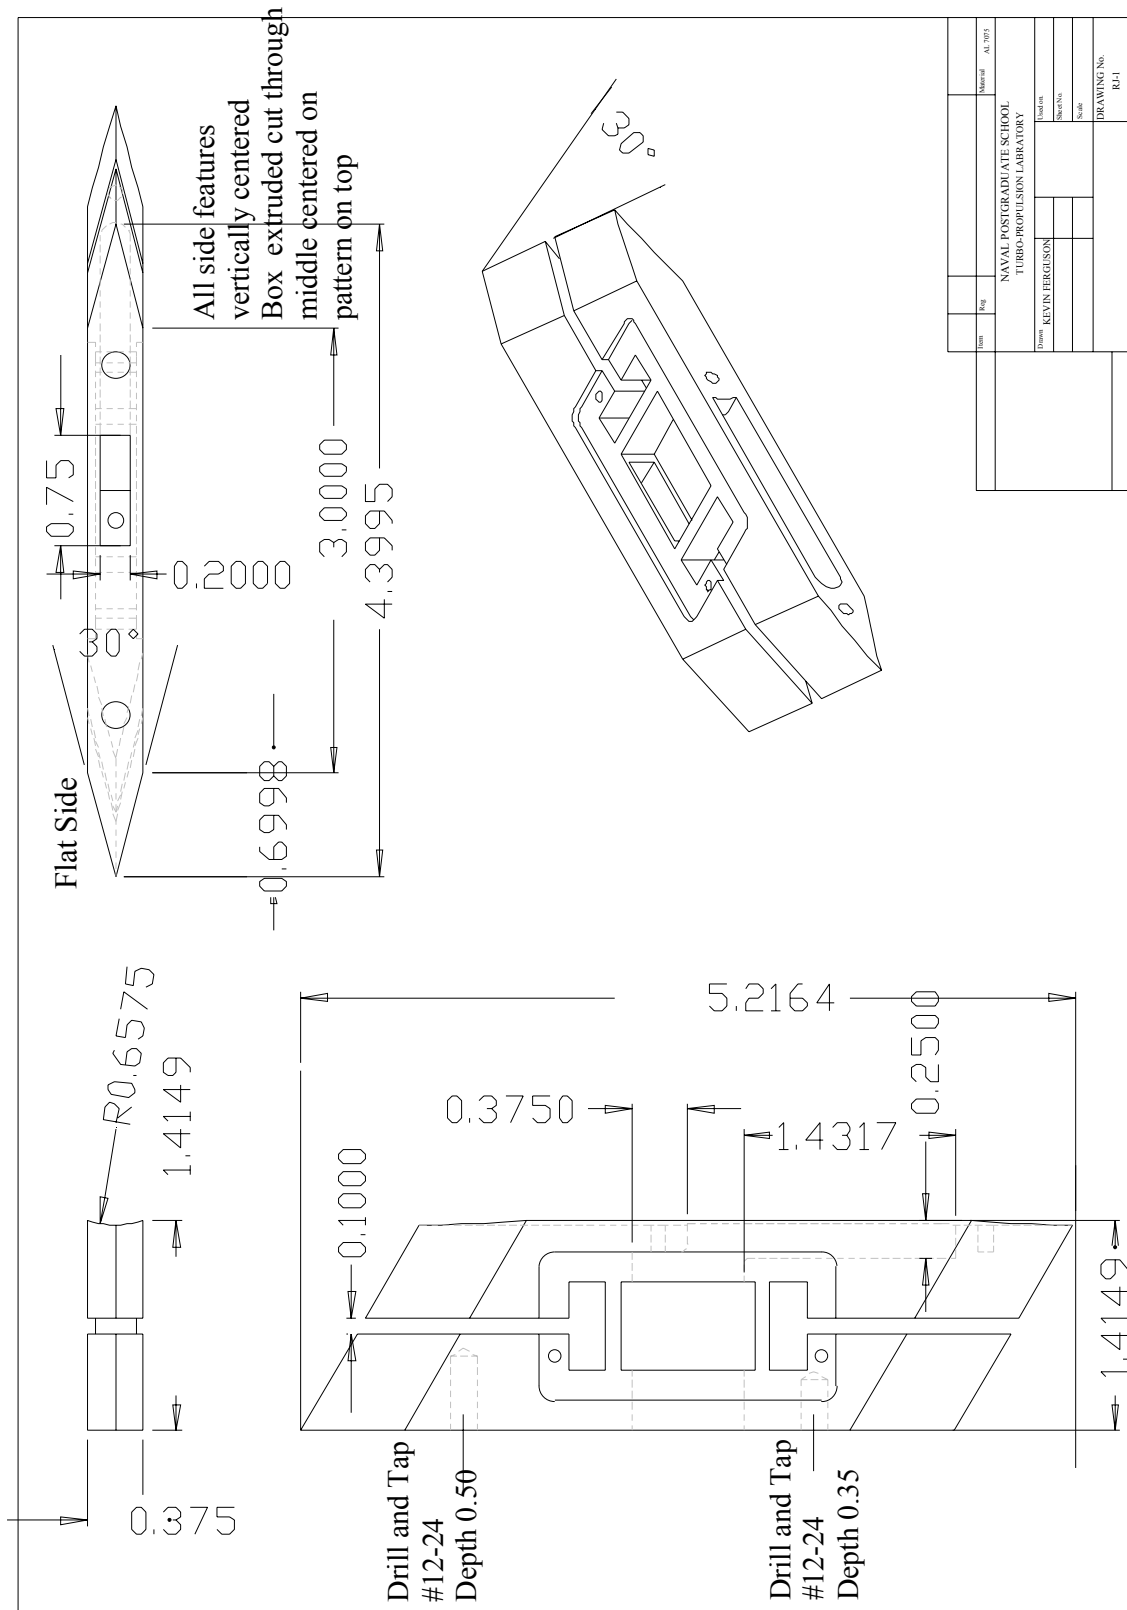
Part drawing: Ramjet wind tunnel strut (RJ-7)
